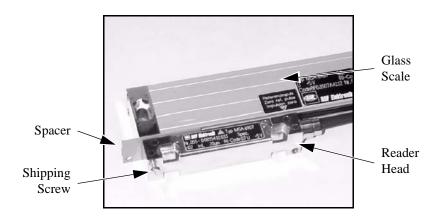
Removing the Z-Axis Glass Scale Shipping Screw
